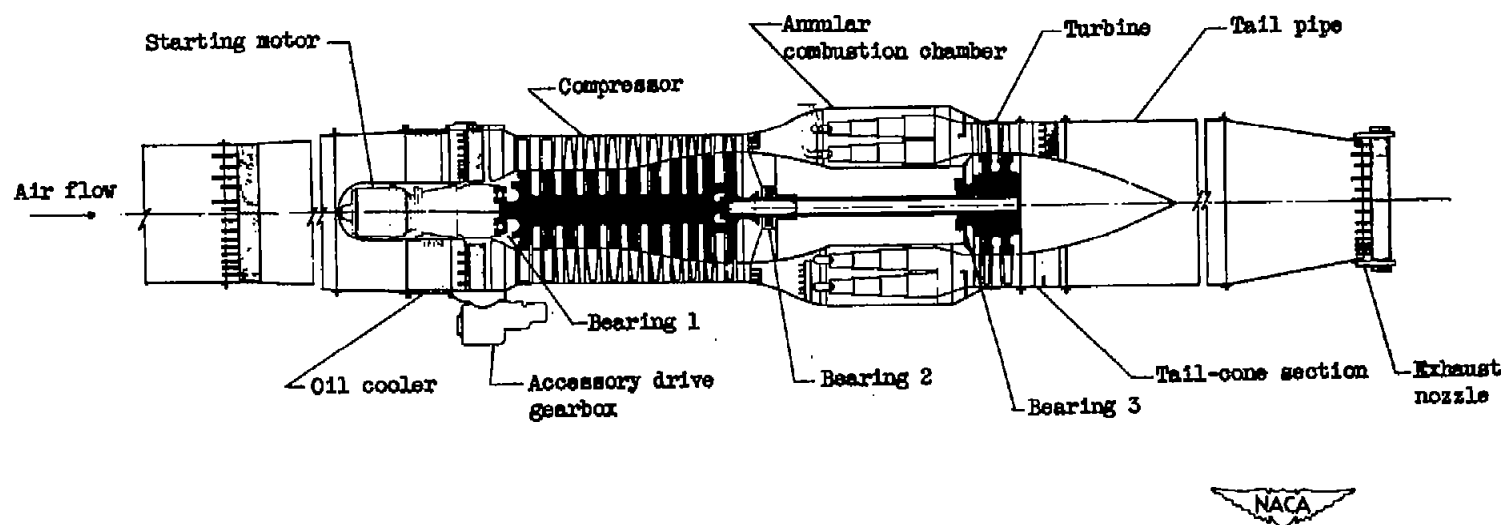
Sectional view of turbojet-engine installation showing component parts.
